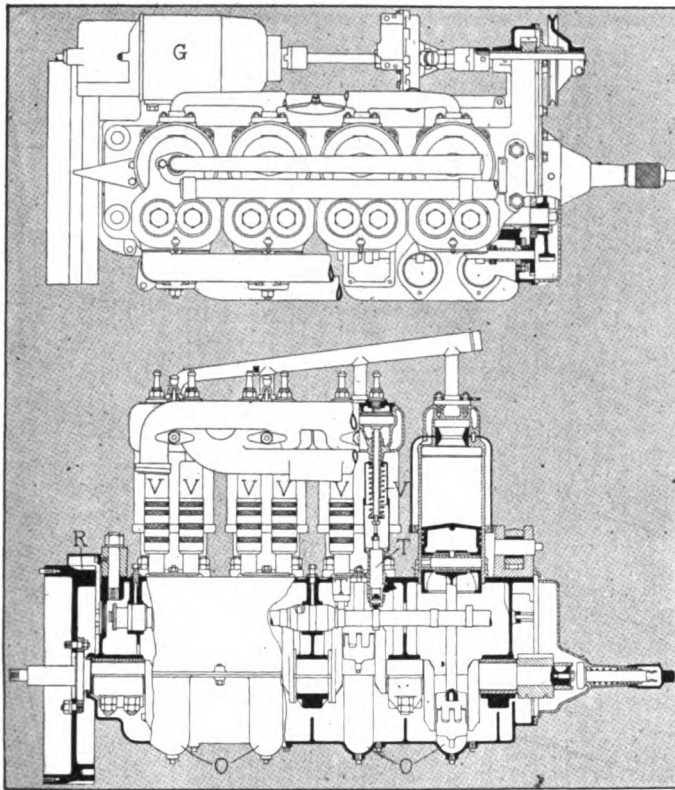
Top view of the Cadillac engine, showing position of generator G
